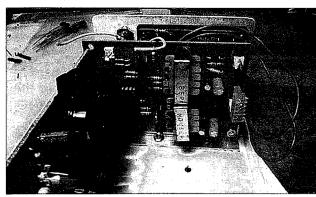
Photo C. Here is a view of the panel meter supply. The QRP bench PC board is mounted on edge.
